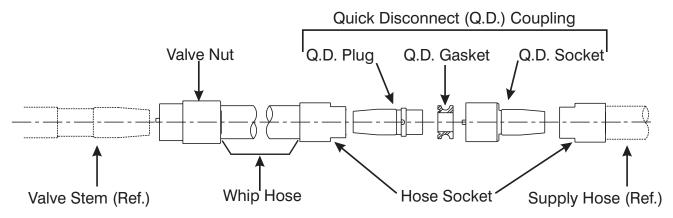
Whip Hose Components and Quick Disconnect Fittings.
